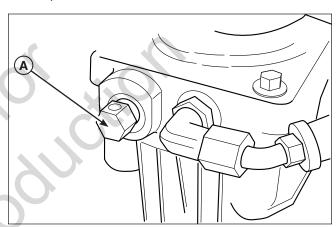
Hydraulic System By-Pass A. Hydraulic Release Valve (left-hand pump shown)
